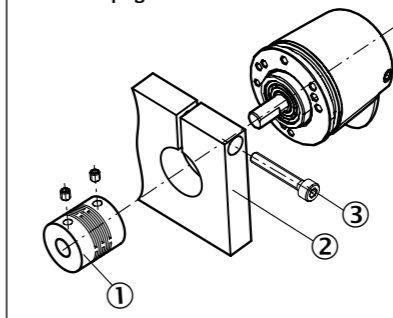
Installing the DBS36 face mount flange with servo-clamps
